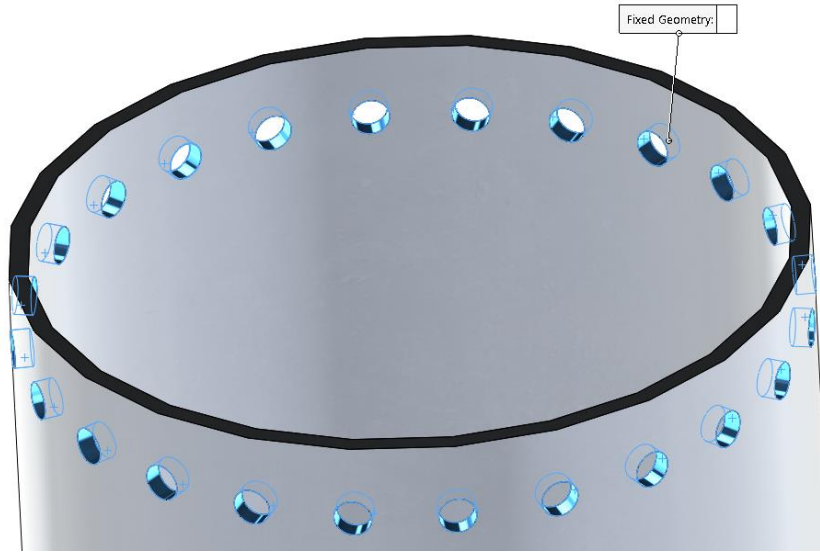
Combustion Chamber Fixed Geometry (Forward Fastener Holes)
